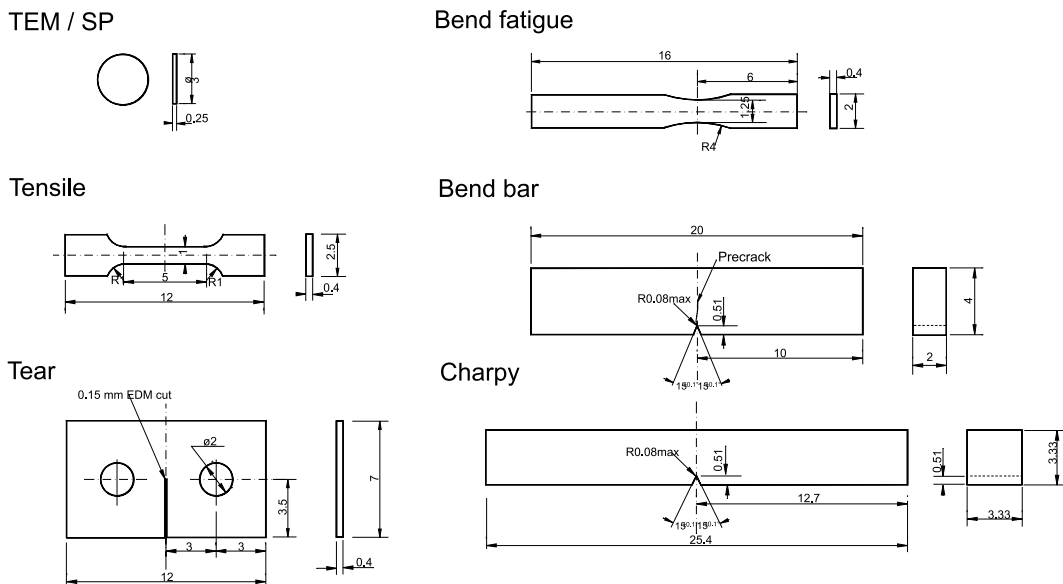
Drawings of the specimens irradiated in SINQ target MARK-II. All dimensions in mm.
